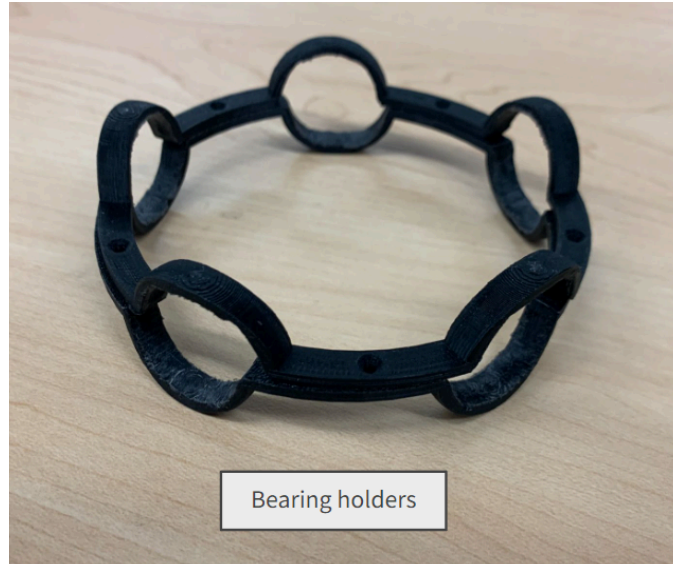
Bearing holders stacked on one another. Their purpose is to evenly distribute bearing balls within the bearing itself, allowing for a smoother turn. There are spots for 5 screws between bearing balls to hold the different pieces together between the inner and outer components of the bearing.
